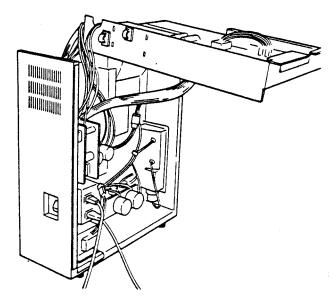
Removing wires from wire clamp and lifting up the PCB block
